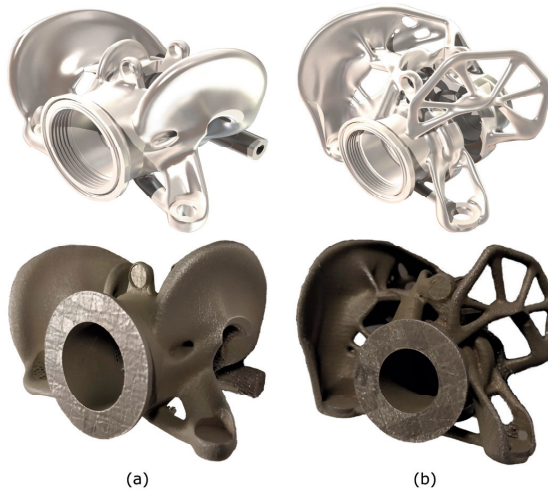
The optimized designs (up) and the 3D printed parts (down) of the brake calipers' housings using selective laser melting (SLM): (a) Front, and (b) Rear (Tyflopoulos, Lien, et al., 2021).
